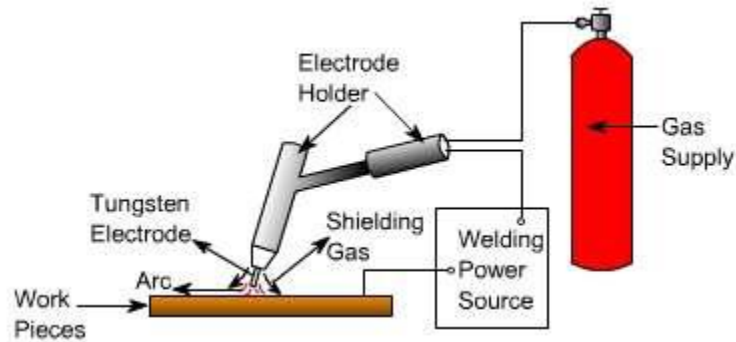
Schematic Diagram of TIG Welding System [27]
